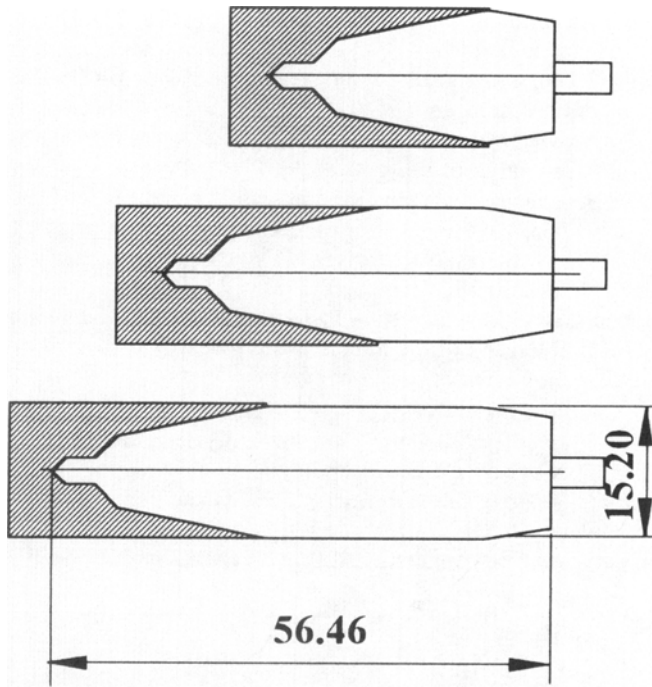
Filling pattern of the penetrator for a die set with a progressively expanding die cavity. Dimensions given in millimeters.
